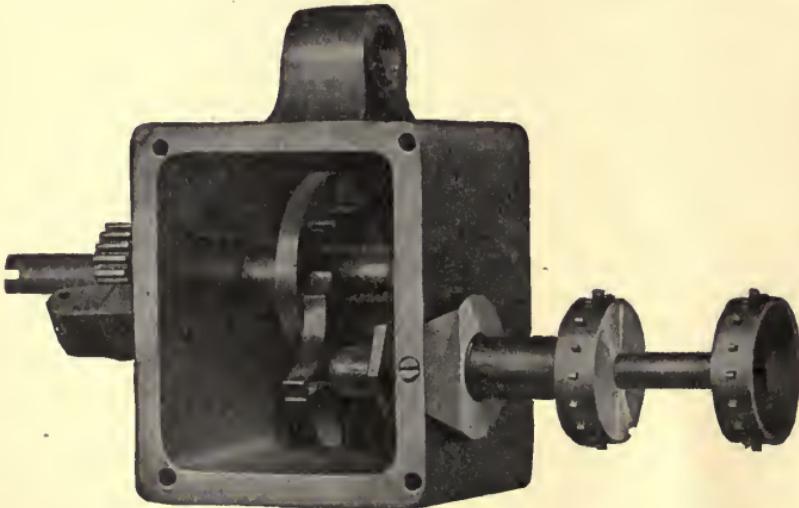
The Geneva movement connected to the sprocket wheel as it appears on the machine.
